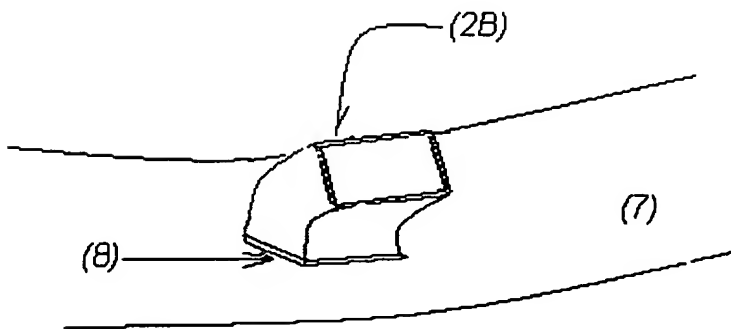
A view of the dashboard windshield heated air supply outlet with a male connector.
